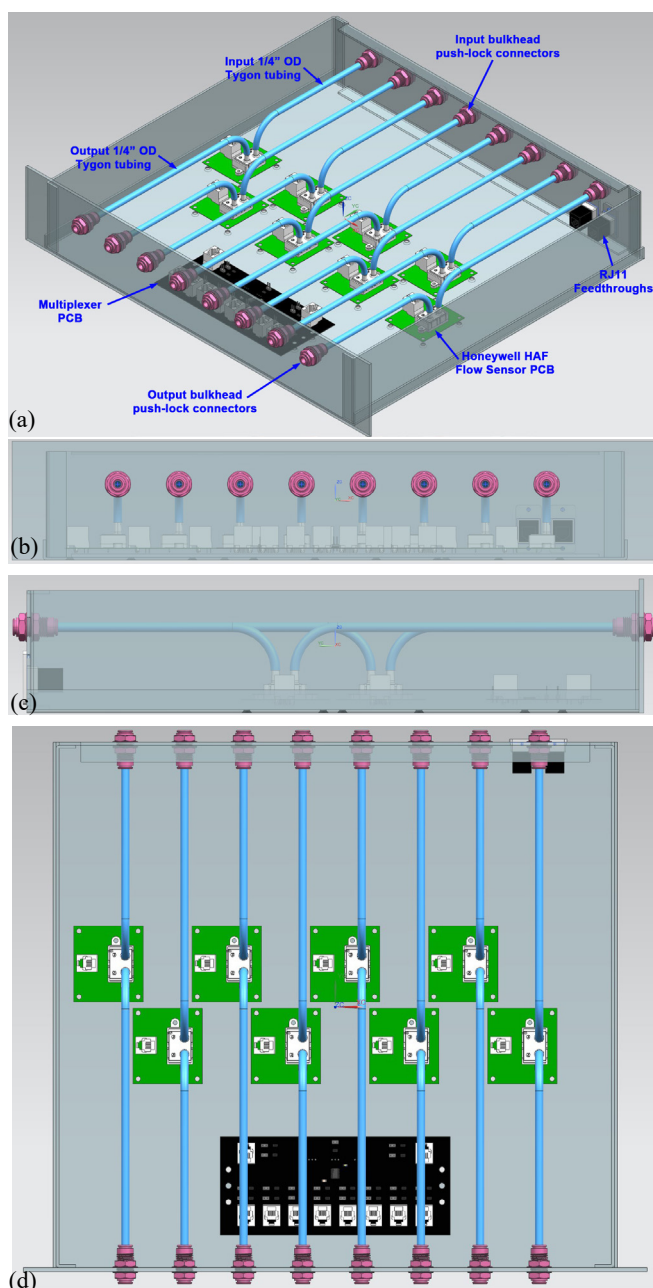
NX 12 prototype drawing of GEM gas flow sensor chassis. (a) Isometric view, (b) front view, (c) left view, (d) top view.
